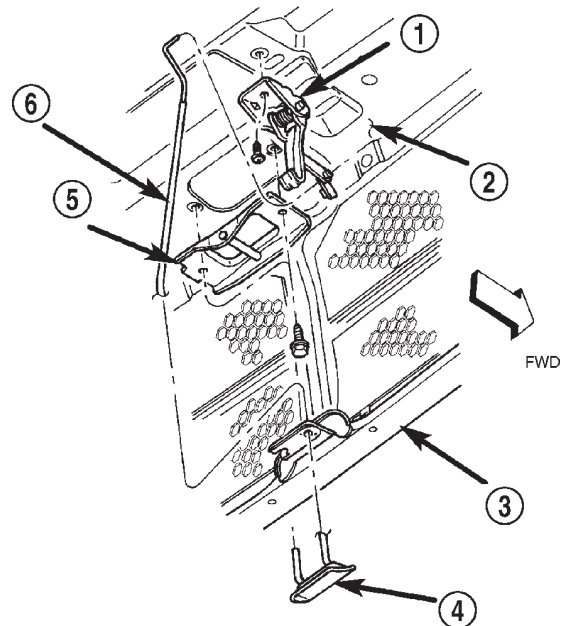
Hood Safety Catch and Latch Striker - Sport
